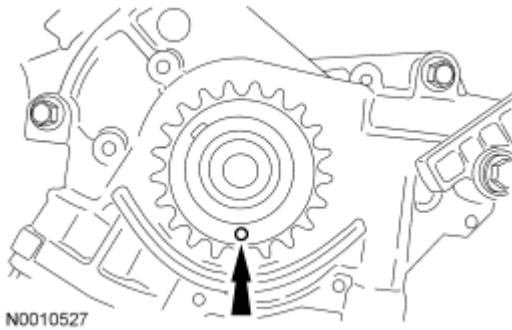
Locating Crankshaft Sprocket Timing Mark
